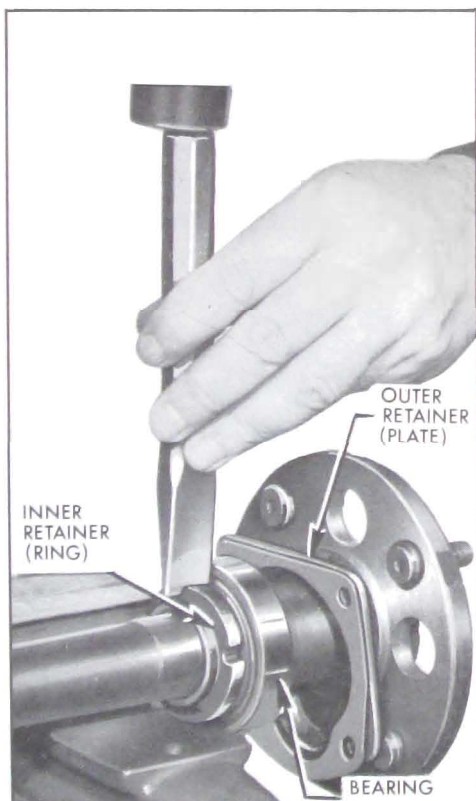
Removing Axle Shaft Bearing Retainer
